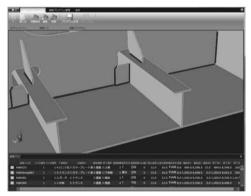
Automatic detection of welding line from 3D-CAD model
